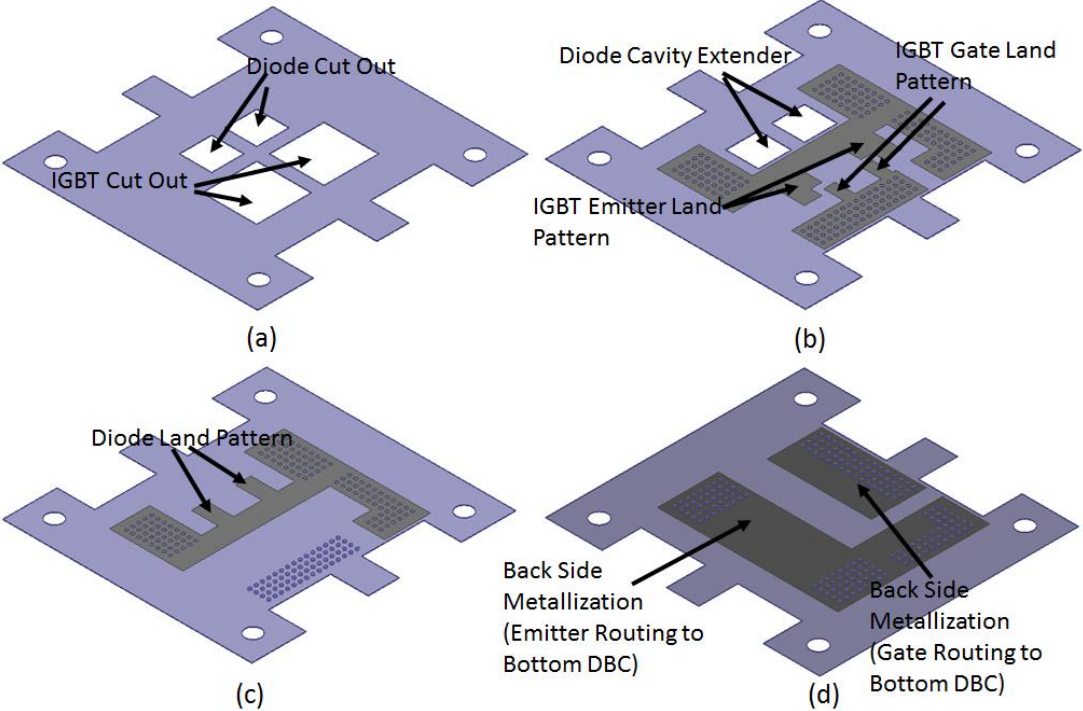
(a) Layer 1, device cutout (b) layer 2, metallization for attaching Si-IGBTs (c) layer 3, metallization for SiC diode attachment (d) layer 4, back side metallization for direct solder attachment to bottom DBC
